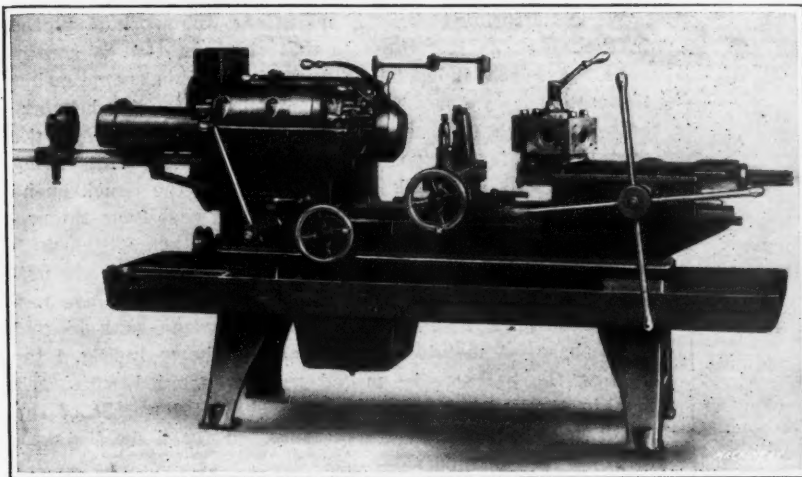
Warner & Swasey No. 6 Geared-head Turret Lathe
